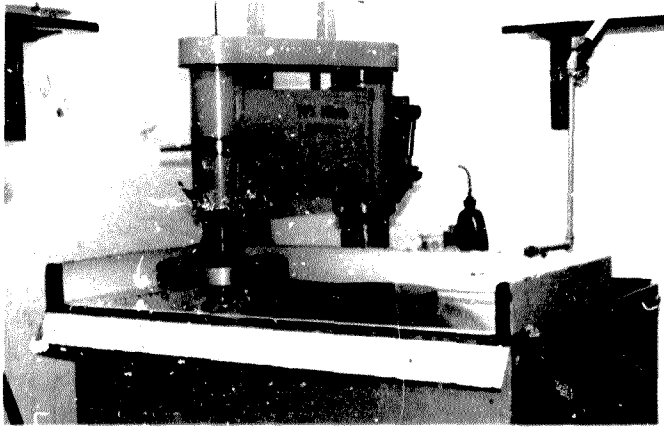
Lapping machine used to Grind End Faces of Rock Cores
